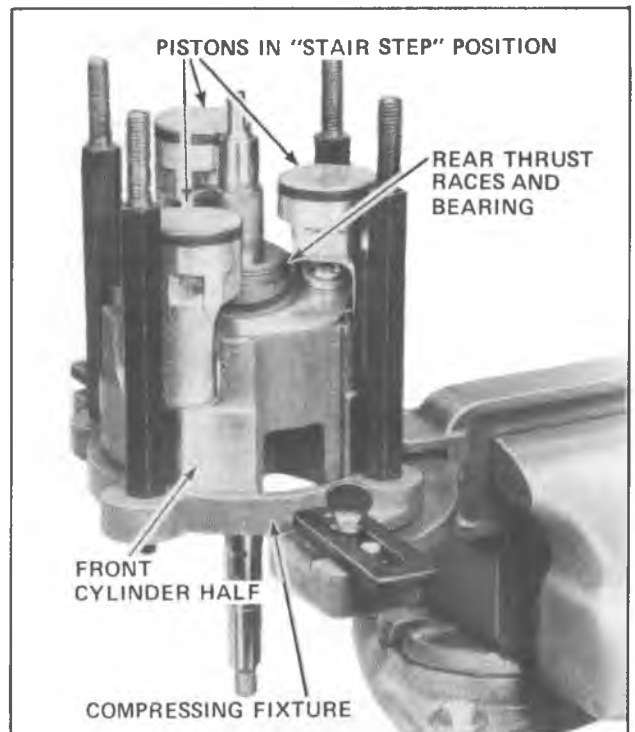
A-6 Pistons Positioned in Stair-Step Arrangement
